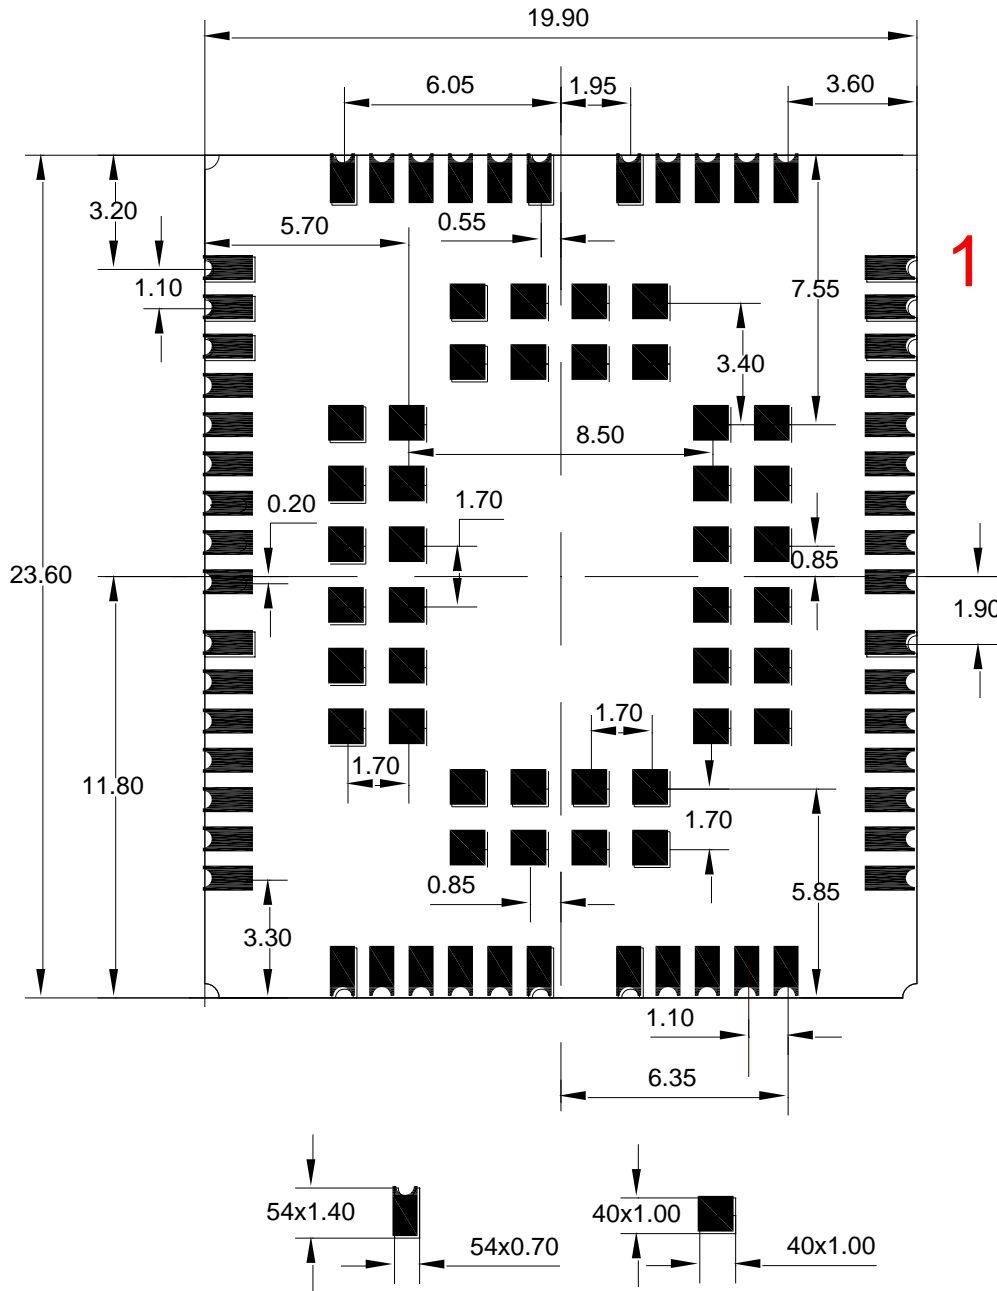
Bottom Dimensions of eM300-8a Module (Unit: mm)
